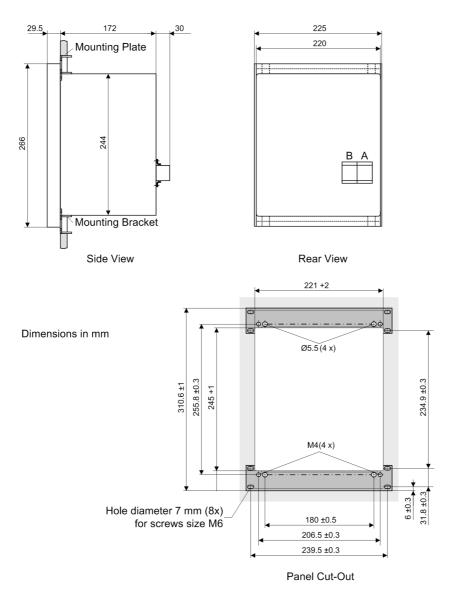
Dimensions of 20-Hz-Band-Pass Filter 7XT3400-0CA00 for Panel Flush or Cubicle Mounting
